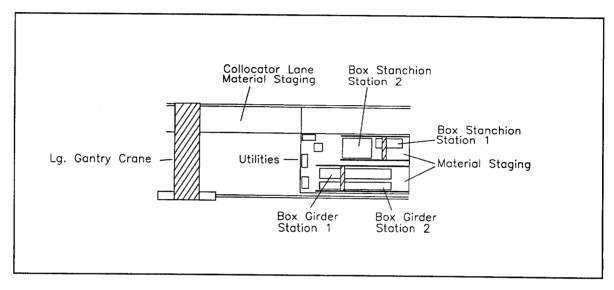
NASSCO Box Girder & Box Stanchion Cell
